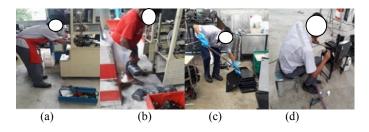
shows working posture in maintenance department including (a) checking process, (b) unassembling parts, (c) cleaning parts, and (d) fixing broken parts.
